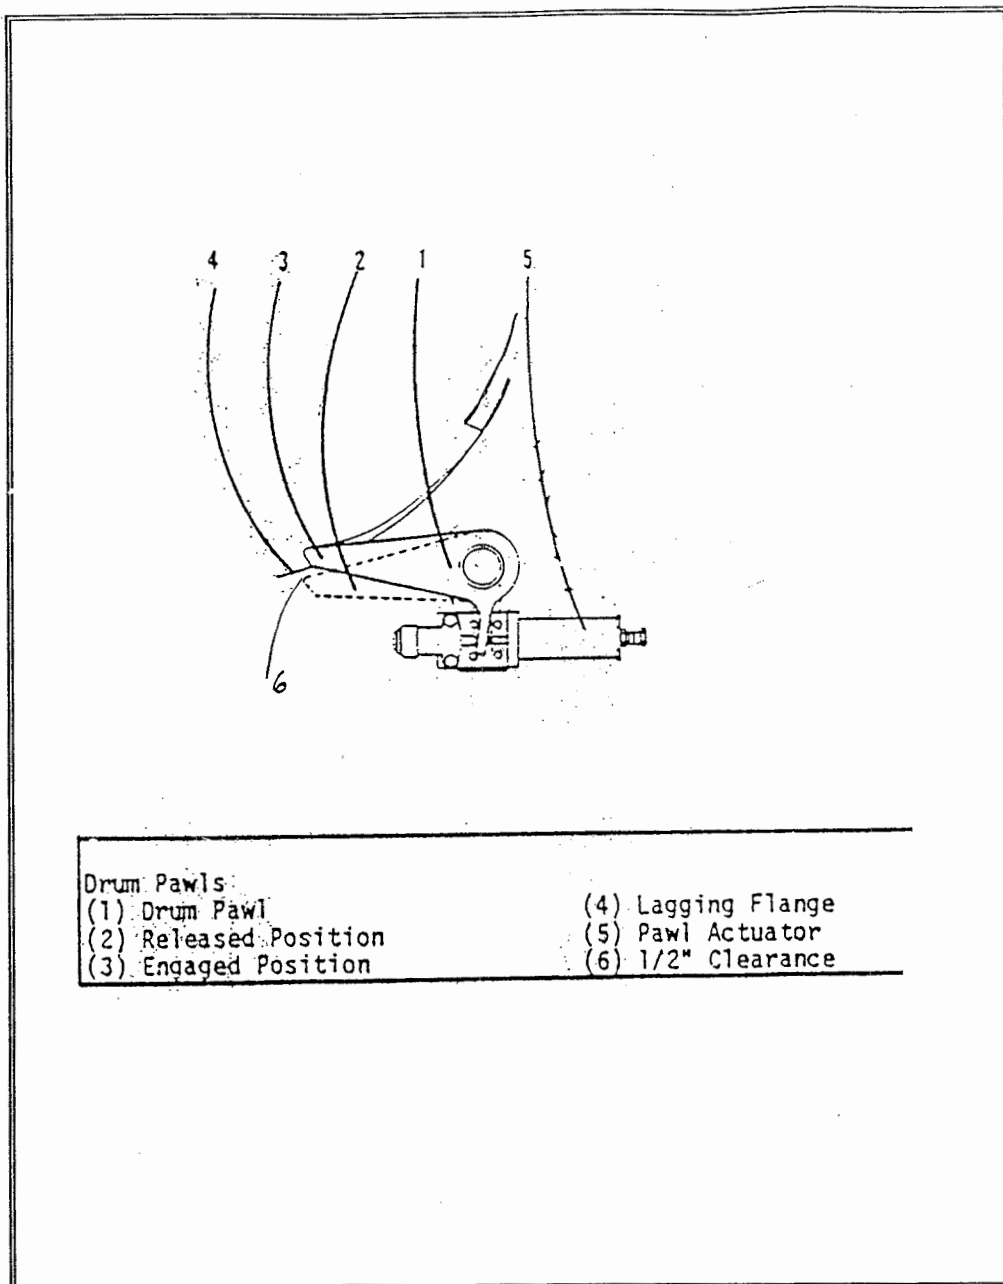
The main hoist drum shaft has a pawl assembly which rides on teeth cut in the lagging flange. When the pawl is engaged, the rope can't wind off the drum.
